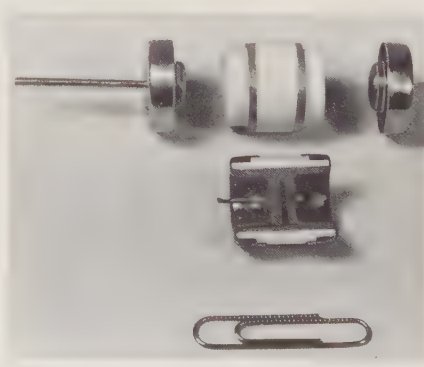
An example of a ceramic-to-metal seal is this electronic tube assembly, showing a metallized alumina ceramic envelope soldered to metal end covers.
